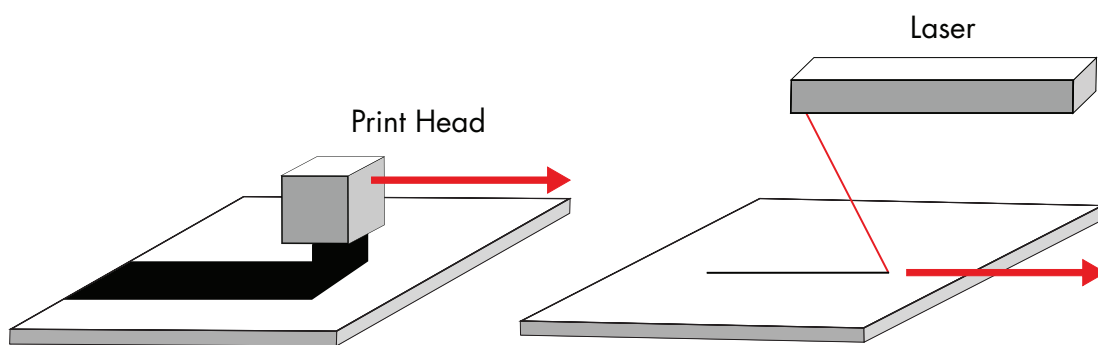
Printheads with large printing width vs. laser beam used in SLS (Selective Laser Sintering).
